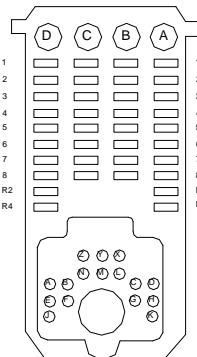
FRONT VIEW OF PLUG BOARD
